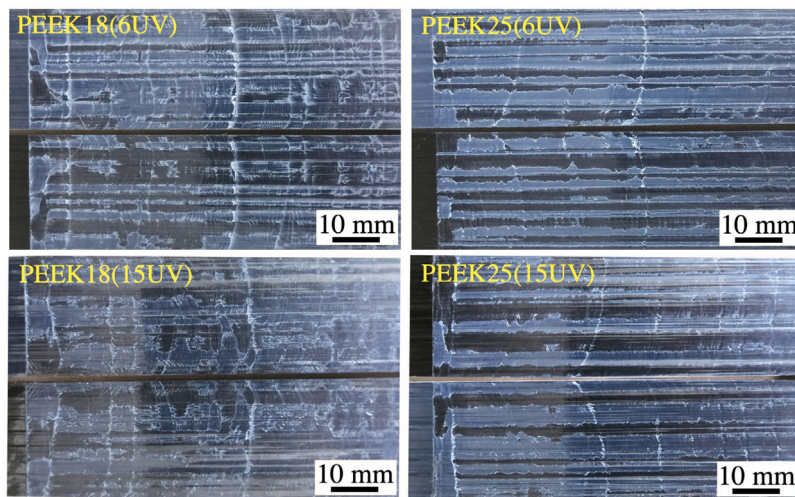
Photographs of the fracture surfaces of the DCB specimens for the laminates interleaved with PEEK18 and PEEK25 films.
